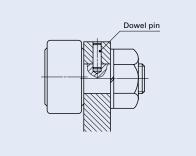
Mounting example of Solid Eccentric Stud Type Cam Follower
